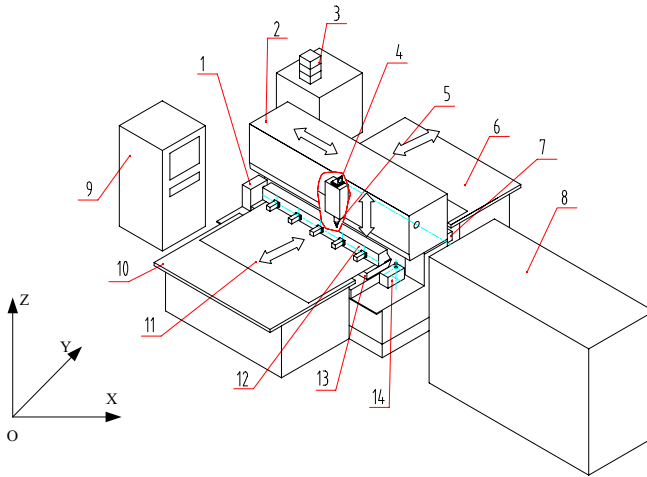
The configuration of the system for laser cutting and welding. 1 stands for positioning machine, 2 for X-axis for manipulator’s translation, 3 for hydraulic control system, 4 for cutting and welding manipulator, 5 for cutting and welding head, 6 for right bracket for steel blank, 7 for right fixture holder, 8 for laser generator, 9 for computer control system, 10 for left bracket for the steel blanks, 11 for steel blank for cutting and welding. 12 for left fixture group, 13 for left fixture holder, and 14 for head exchanging machine.
